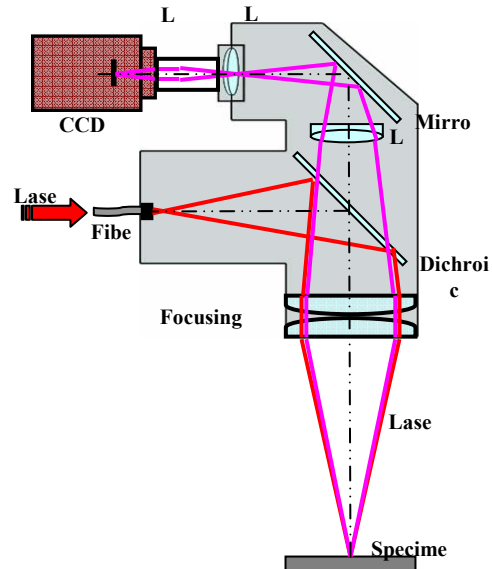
Layout of the Optical system of laser welding head assembly for Digital Image Processing
